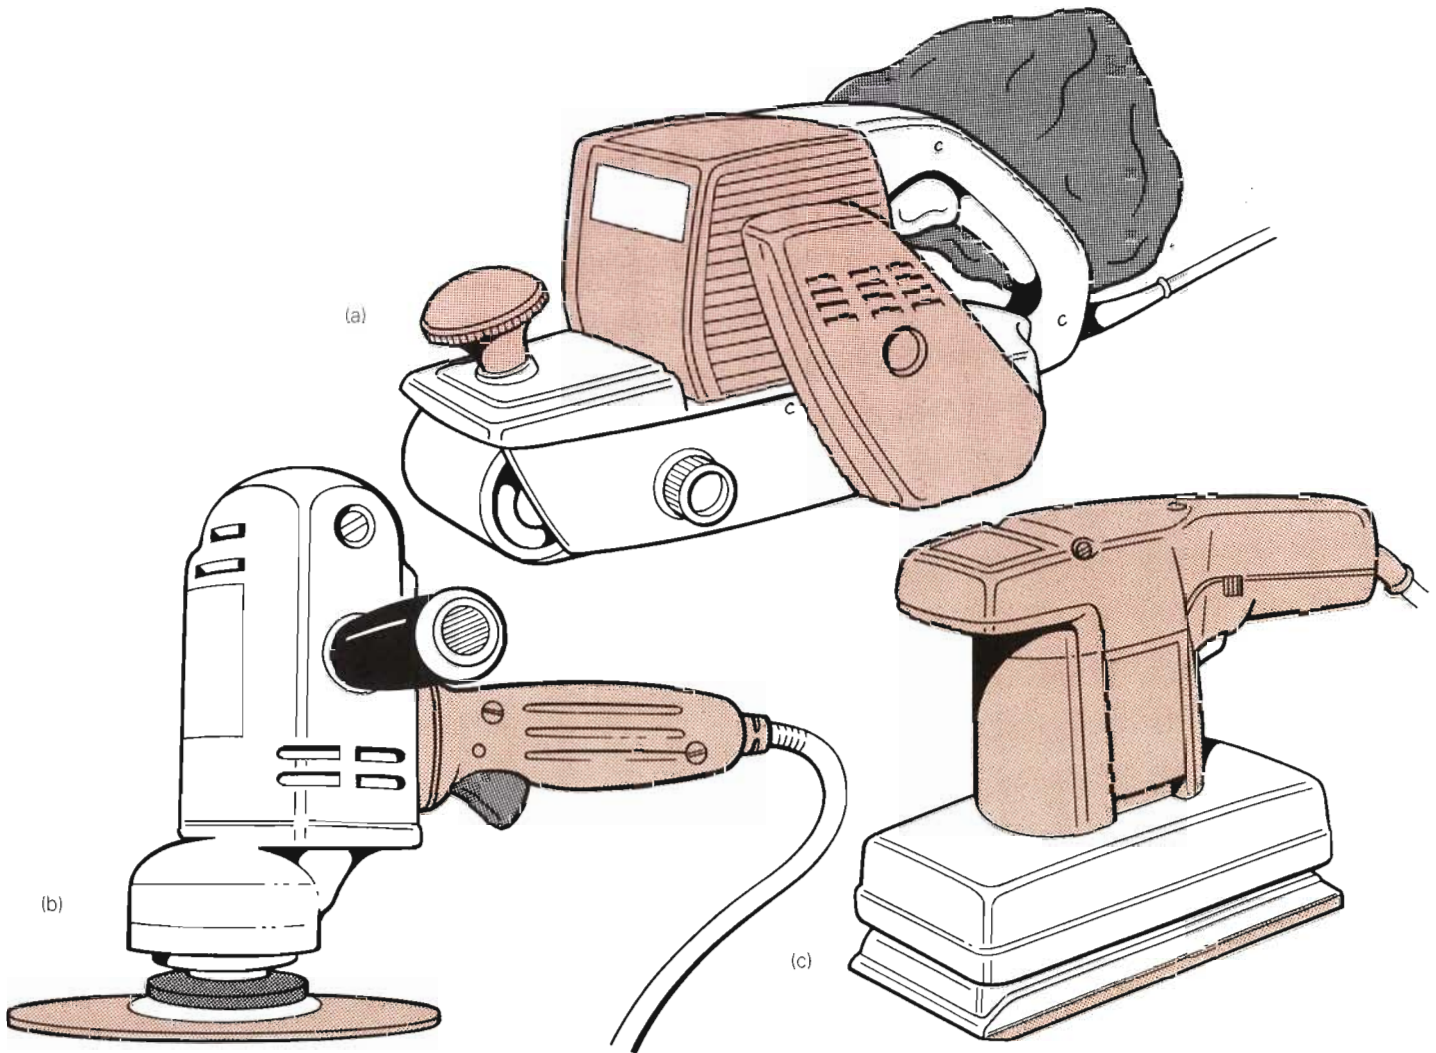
Types of portable sander: (a) portable belt sander, (b) portable disc sander, (c) portable finishing sander.
